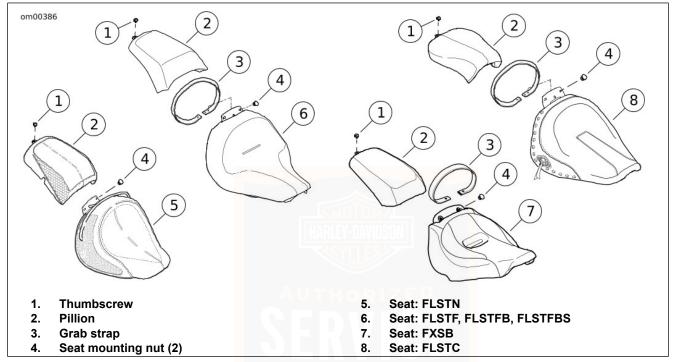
Seat: FLSTC, FLSTF, FLSTFB, FLSTFBS, FLSTN, FXSB
